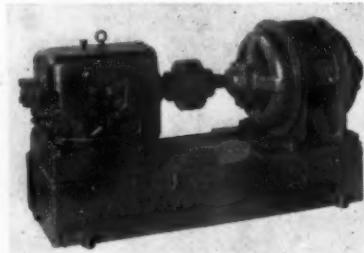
Oilgear Fluid Power Feed with Remote Controller and Oil Reservoir.
